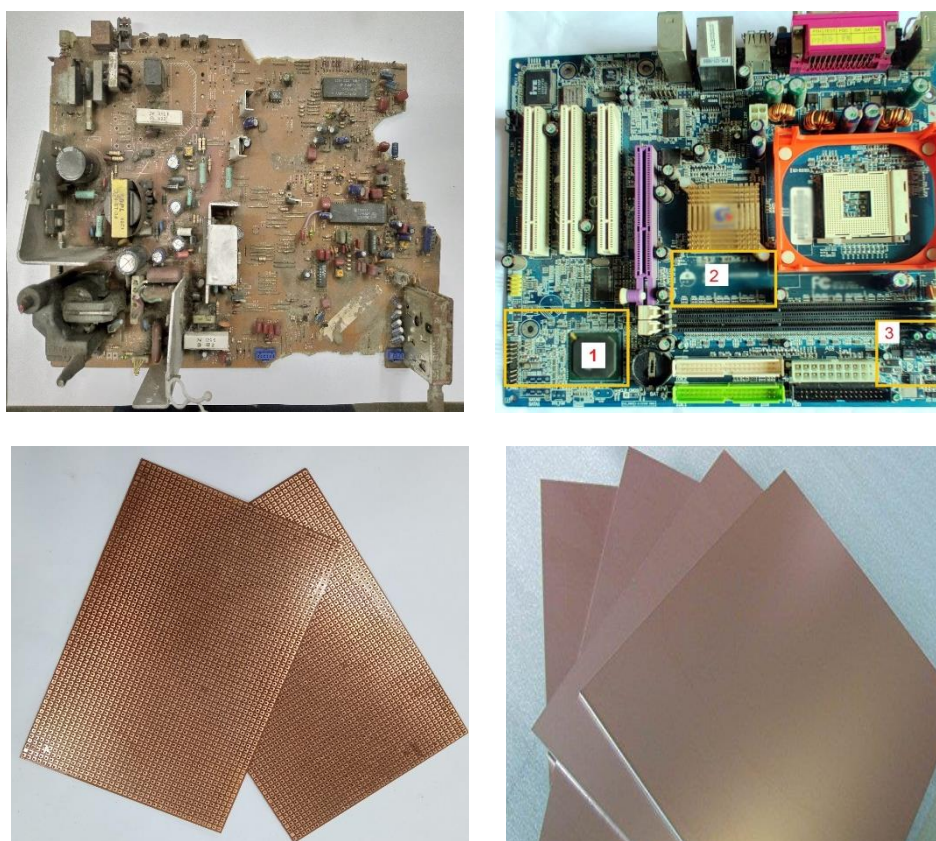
(a) FR-2 Waste PCB recovered from old TV set; (b) FR-4 Waste PCB recovered from Personal Computer; (c) FR-2 Virgin PCB store bought and (d) FR-4 Virgin PCB procured online
